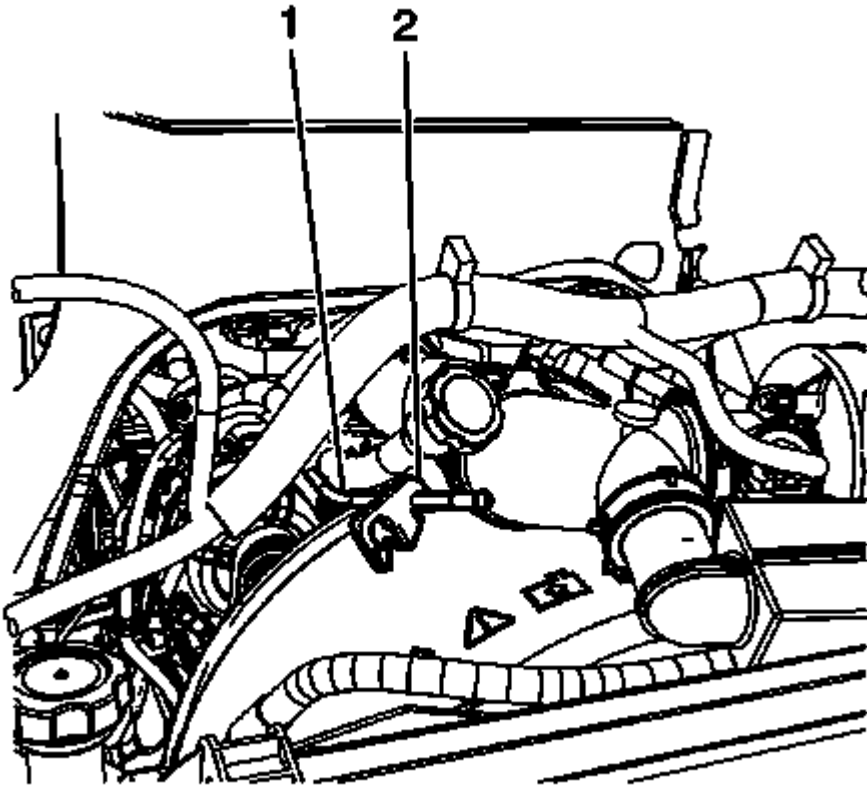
View Of Oil Level Indicator Tube & Air Conditioning Line Retainer Clip
